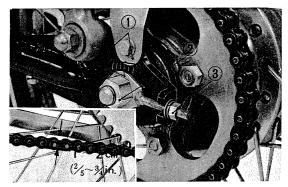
① Index mark and side scale ② Rear axle nut ③ Adjuster nut
